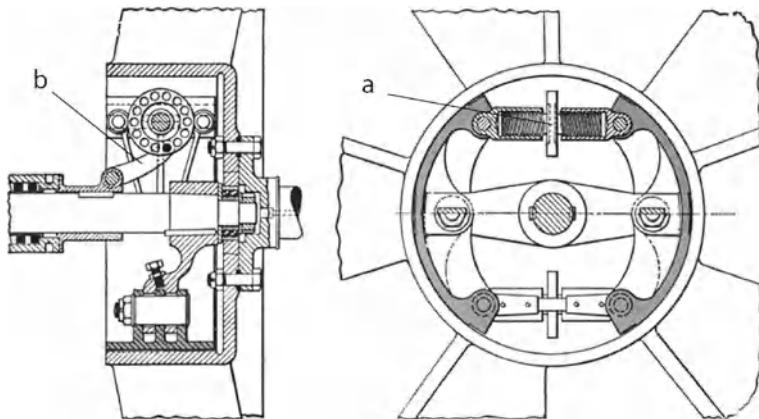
Radial shoes clutch. The shoe displacement is caused by a screw mechanism *a*, operated by the clutch pedal through a crank *b* (from Genta and Morello 2009)
